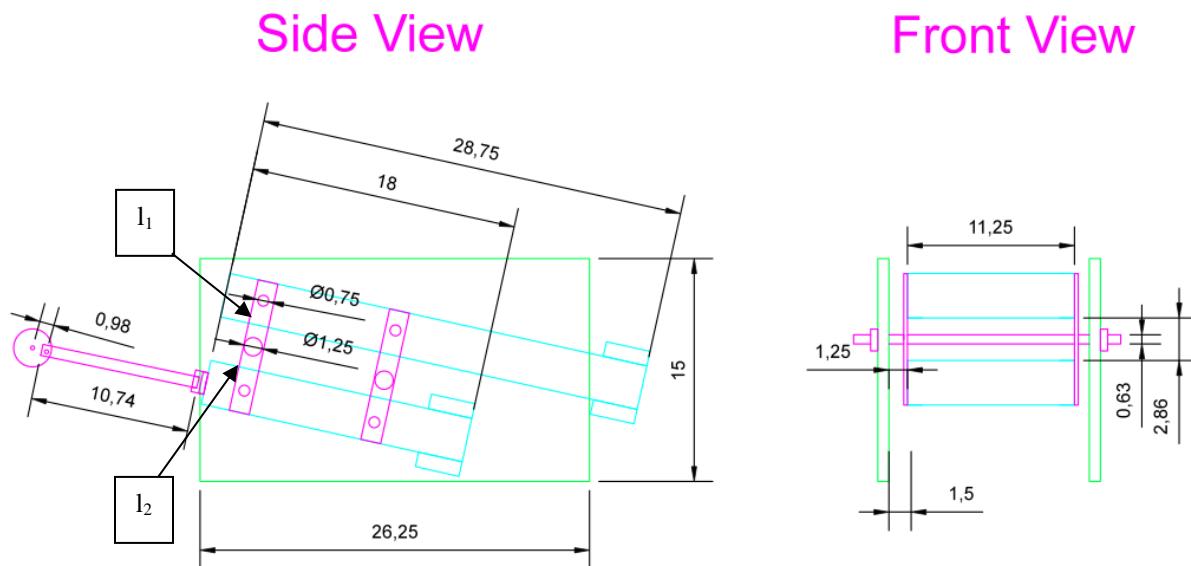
Side elevation view of sieve system (left); front elevation view of sieve system (right)
